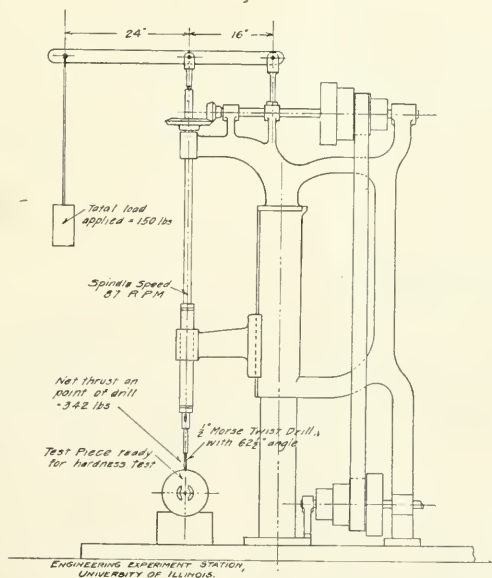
DRILL PRESS, SHOWING METHOD OF MAKING
